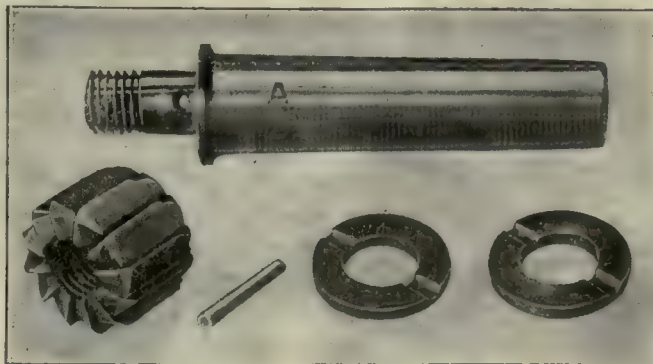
ARBOR AND THREADED END MILL DISASSEMBLED
